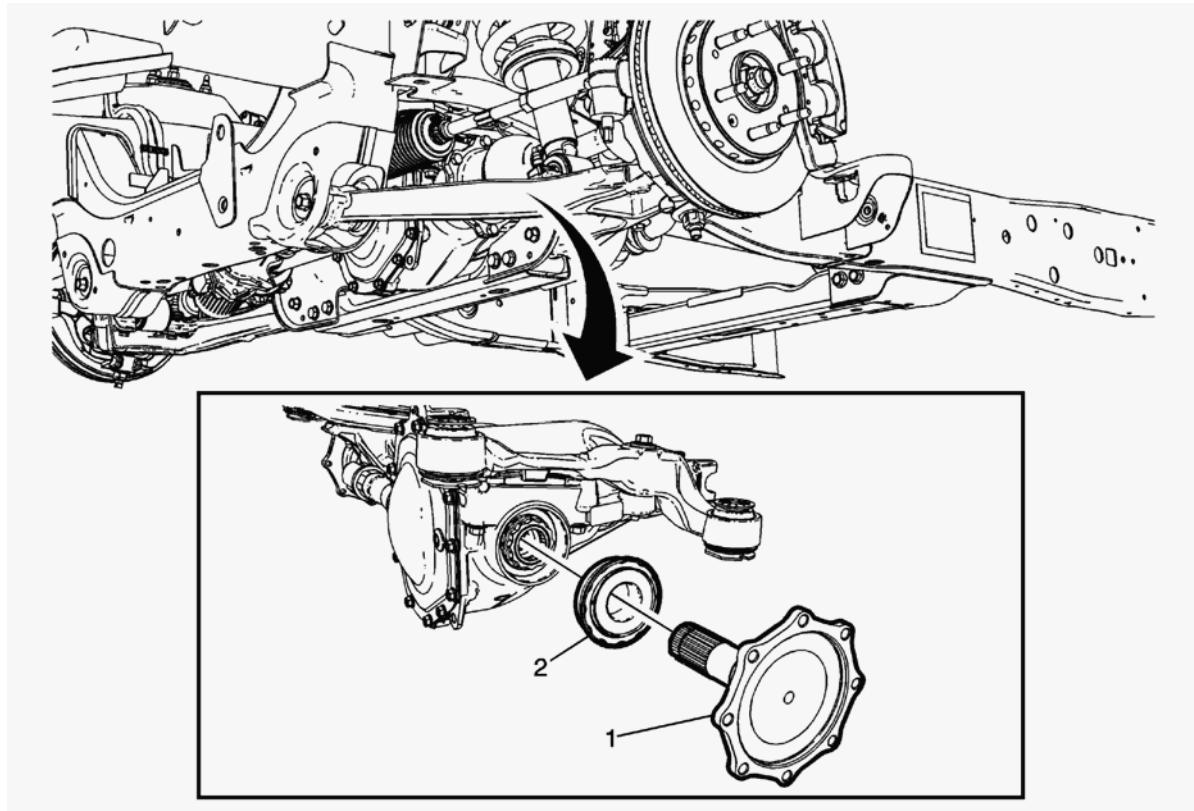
Identifying Front Drive Axle Inner Shaft And Seal
